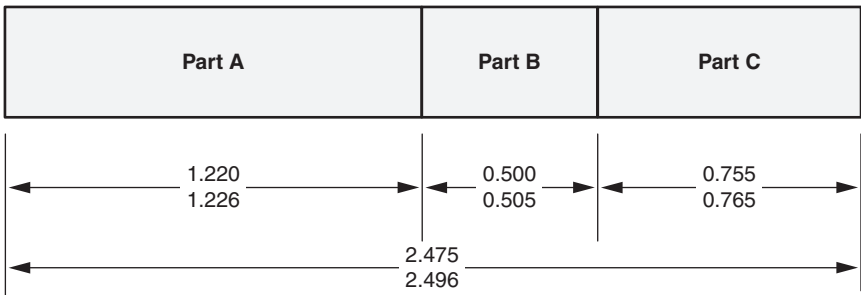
Conventional stack tolerance dimensioning.
